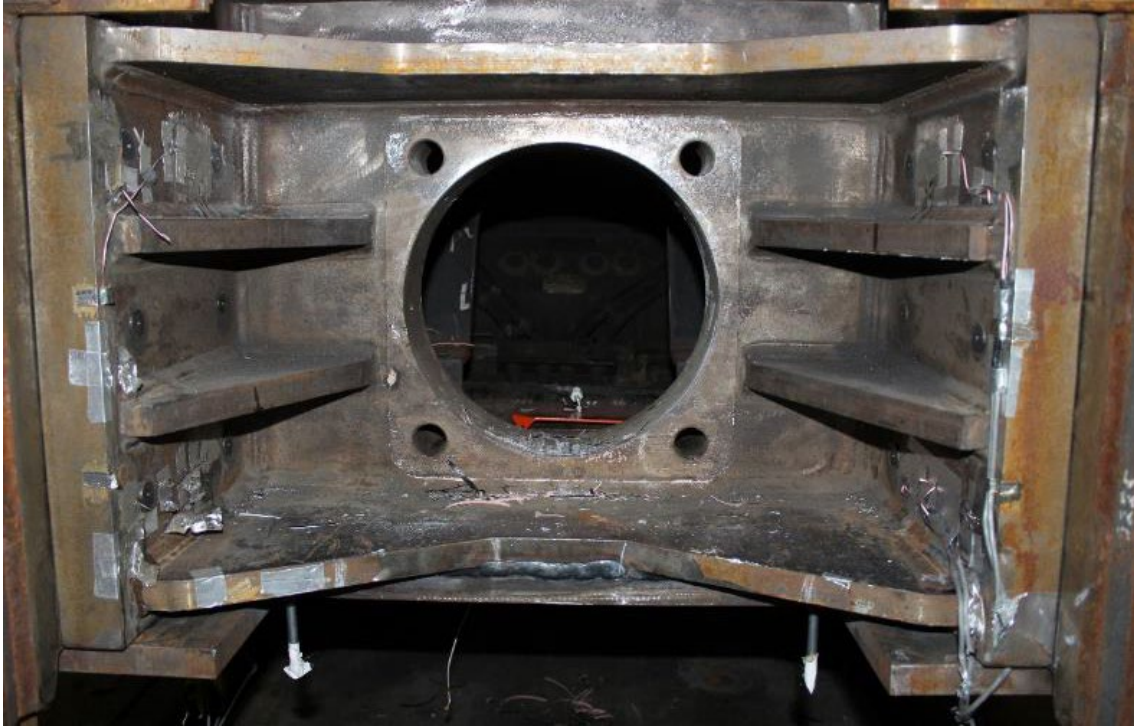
Sliding Lug Bolted into Draft Pocket after Test
